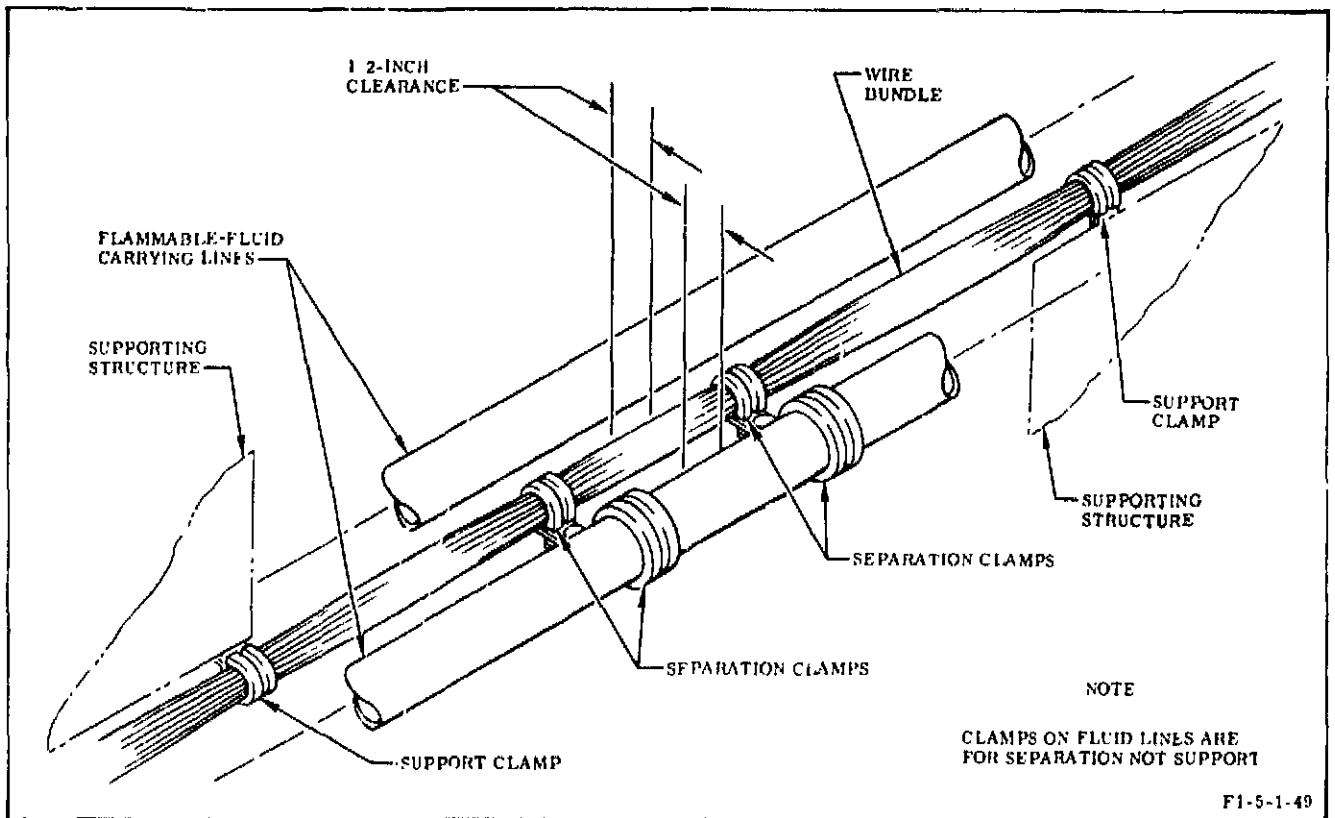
Electrical Harness or Cable Support and Separation Clamping
